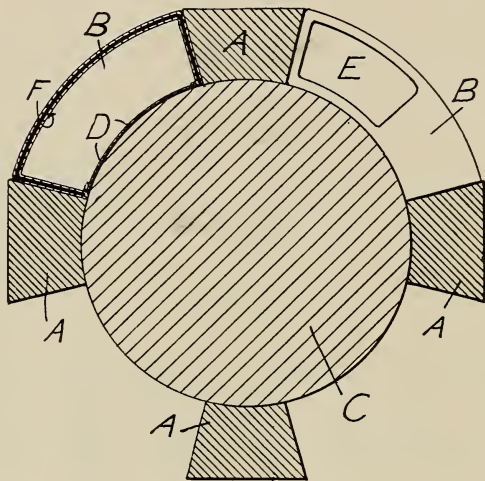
THE DOOTSON ROLL LUBRICATOR.
